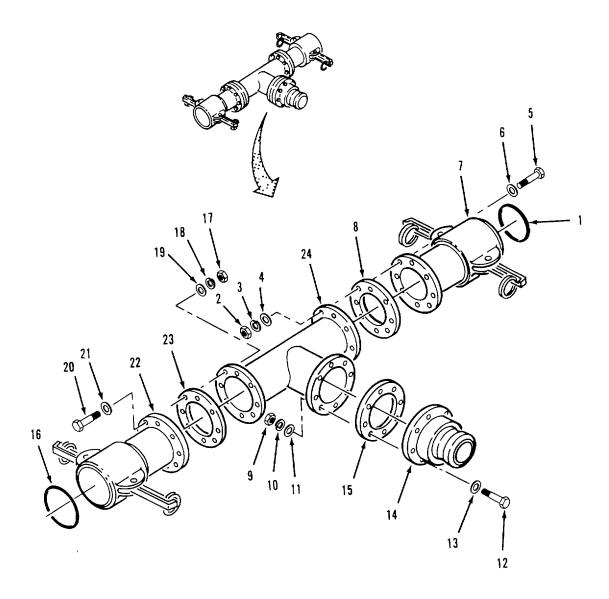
Tee Assembly (9112-Y1) Disassembly.
